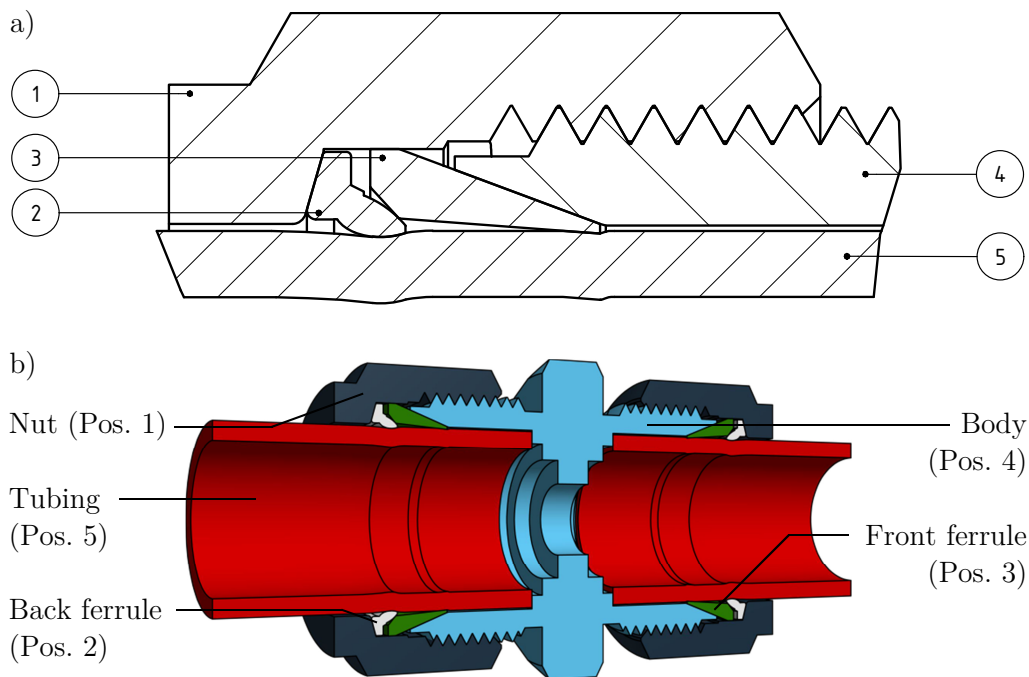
Principle of Swagelok fittings. a) Detail view of the inner parts. b) half-sectional view of a straight Swagelok fitting that fits two tubes of the same diameter.
